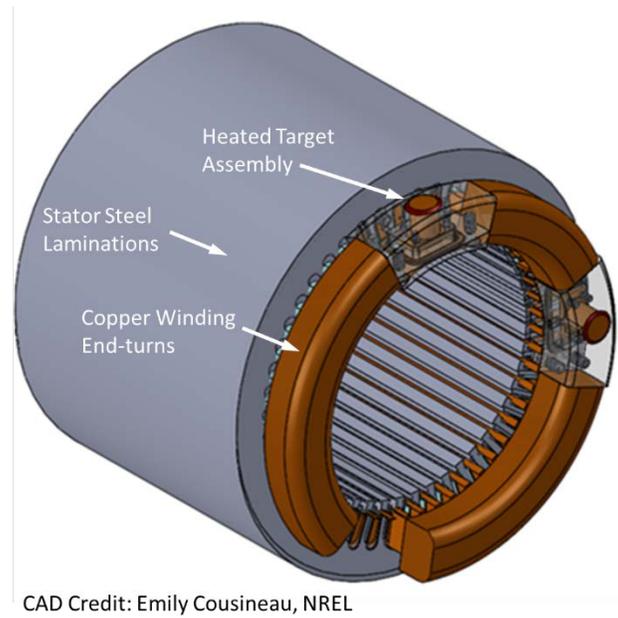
Electric machine stator with mounted heated target assembly within the end-windings cutout.
